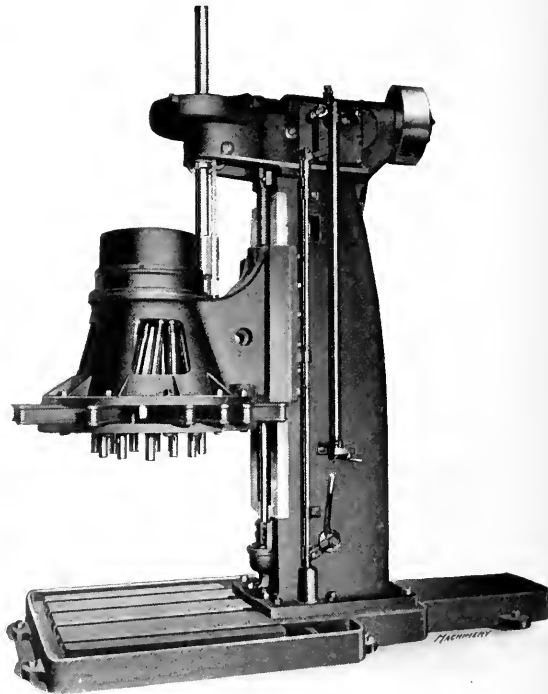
Harrington No. 72 Multiple Spindle Drilling Machine
